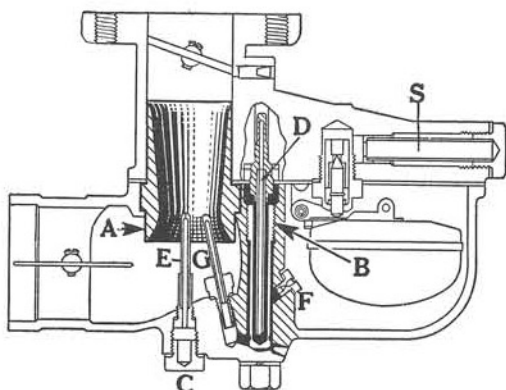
Cross sectional view of Ford model "A" carburetor. Names of parts: A, single venturi; B, secondary well; C, lower drain plug; D, idling jet; E, main jet; F, compensating jet; G, cap jet; L, main assembly bolt; S, filter screen.
